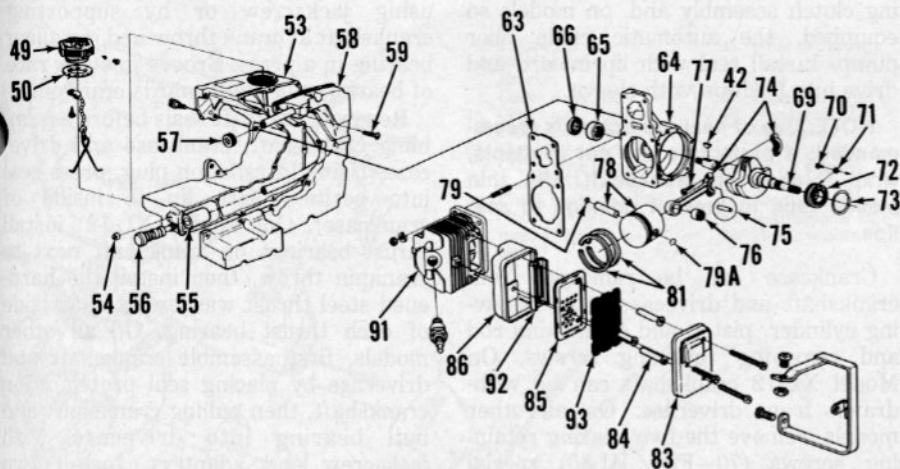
Exploded view showing latest type fuel tank and later construction of power head; refer to Fig. HL34 for early units. Ball bearing (72) is retained on crankshaft by snap ring (73) and in drivecase by two screws (70) and special washers (71); refer to Fig. HL36. Latest models have 31 loose needle rollers (75) at crankpin; earlier models have 28 rollers. Tank cover (58) is sealed to tank (53) with cement (Homelite part No. 22788) and is retained with 16 screws (59). Later tanks are permanently bonded.
